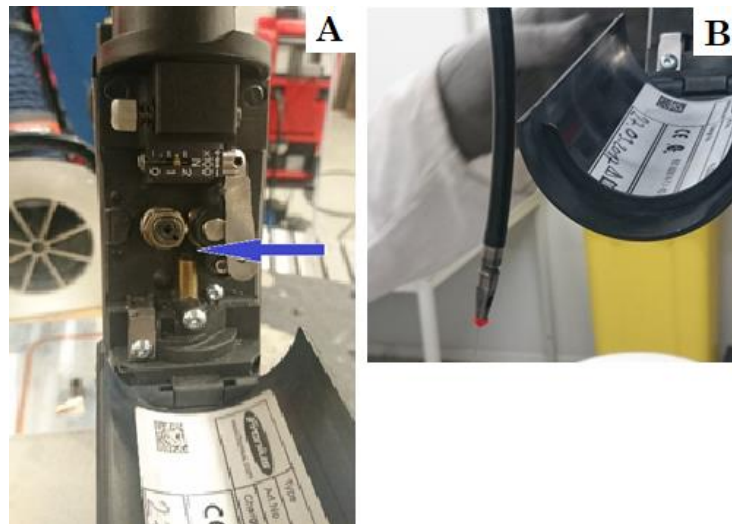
Pass the wire through the torch into the last tube. Press the button in the torch that feeds the wire
